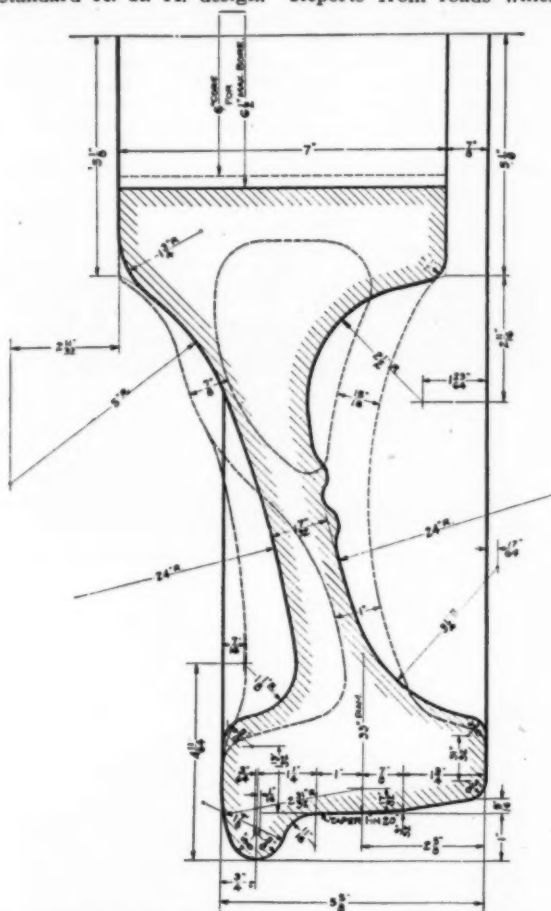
Single Plate 700-lb. Cast Iron Wheel with Reinforcement Rings
